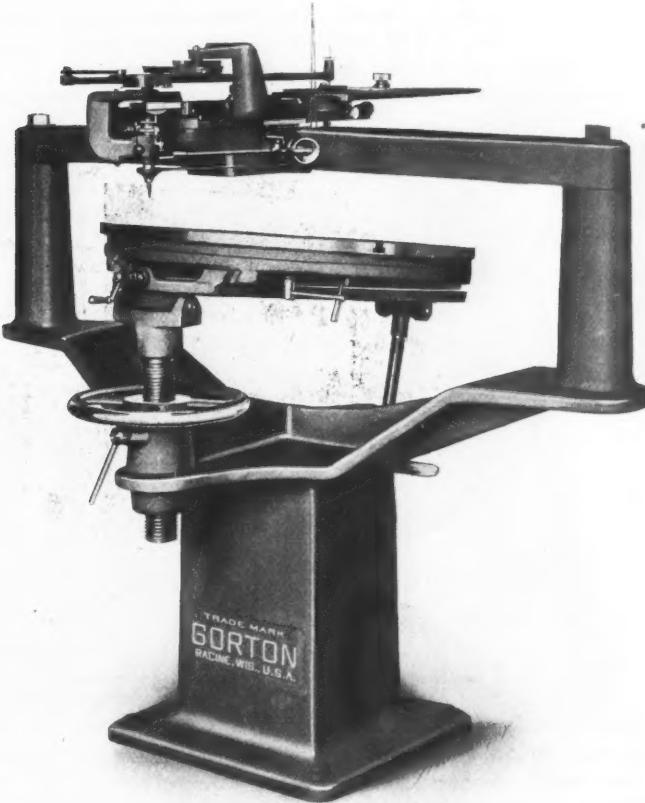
Engraving Machine specially designed for Engraving Automobile Tire Mold Rings
